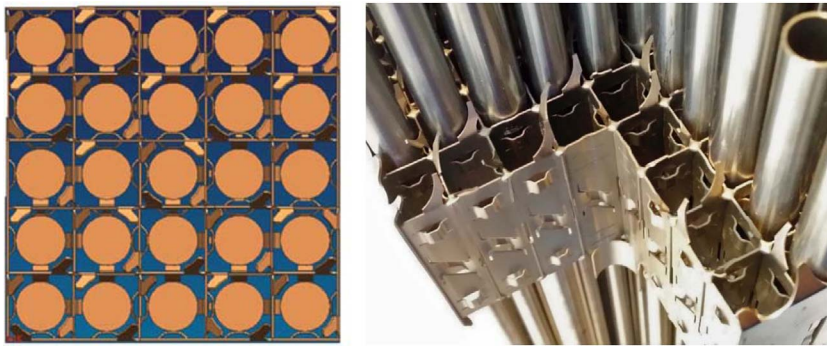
Typical structures of the spacer grid used in the rods fuel assembly.
